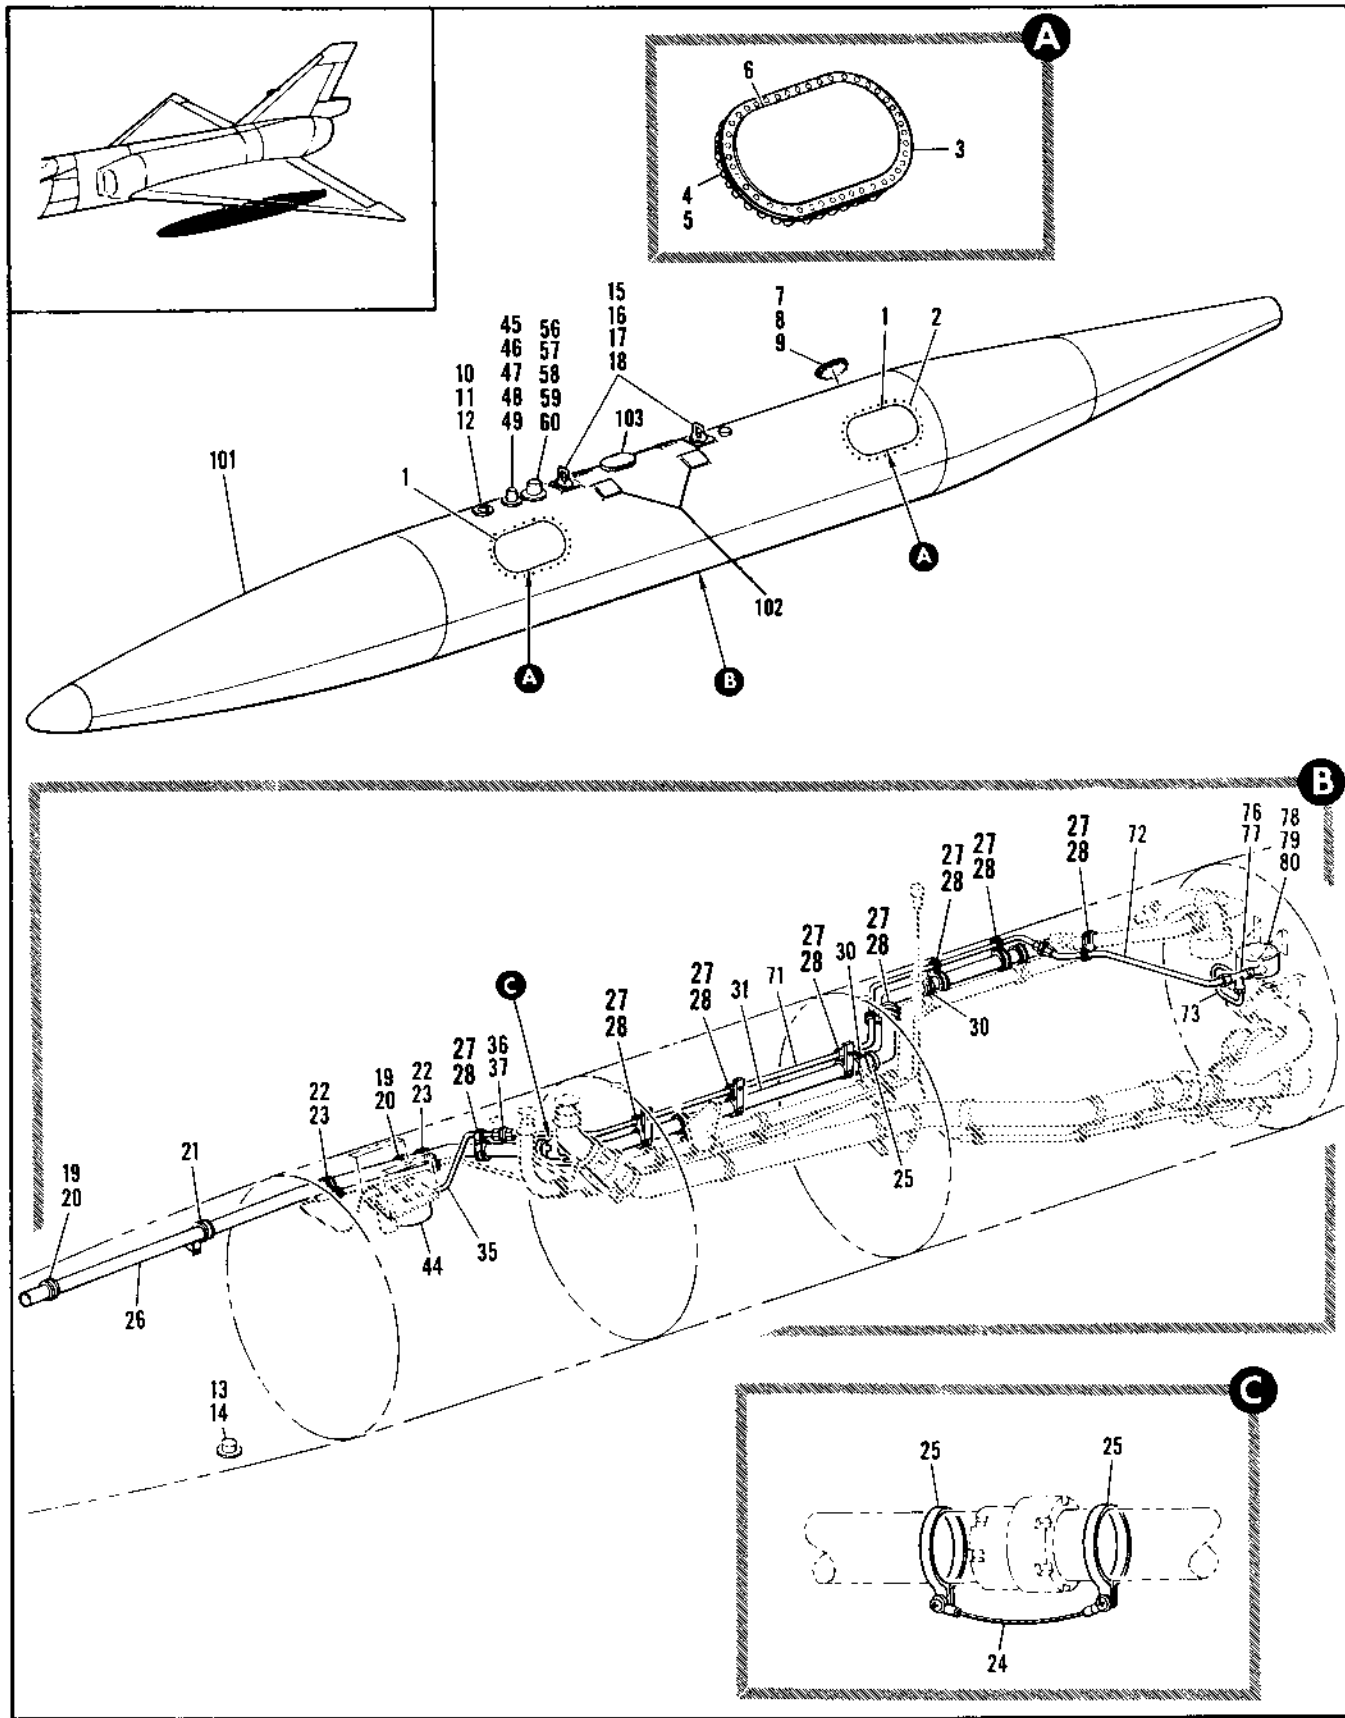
External Fuel Tank Assembly (Sheet 1 of 5)
